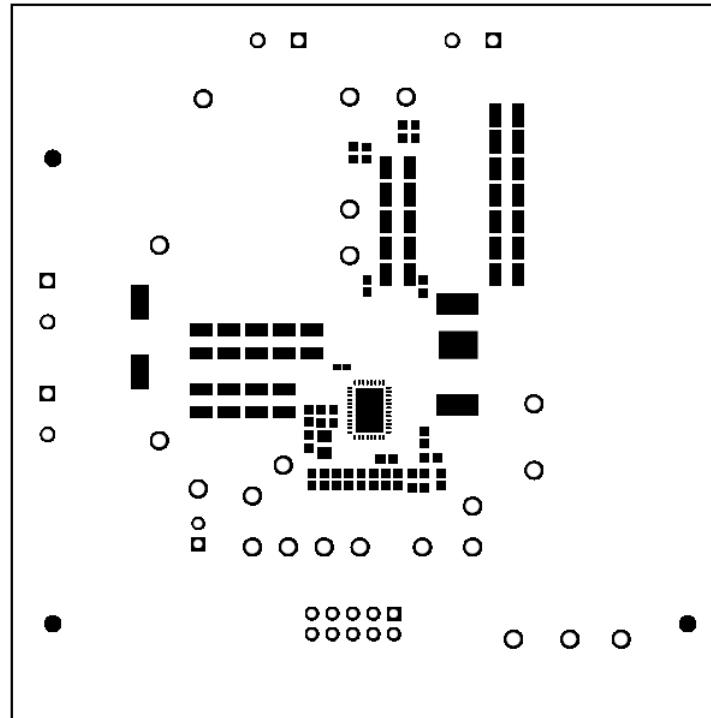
PWR-784EVM Top Solder Mask (Top View)
